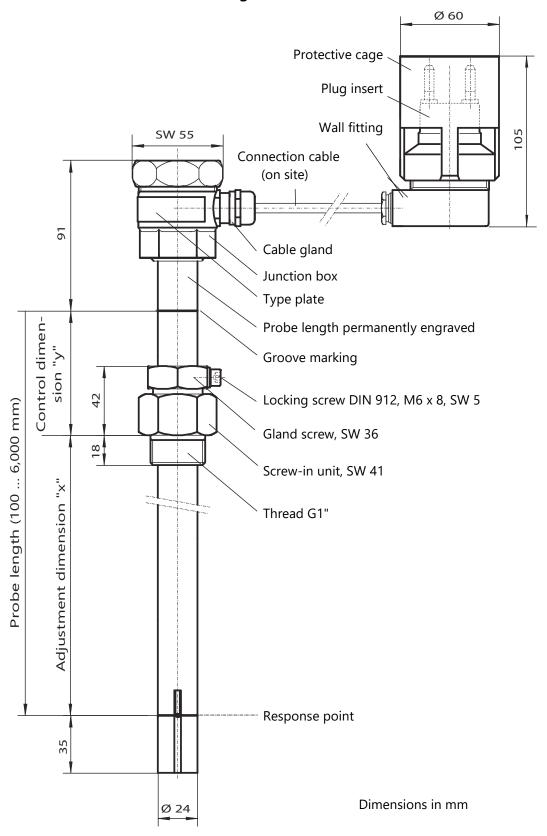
Overfill Prevention Sensor 83 UV with wall fitting
